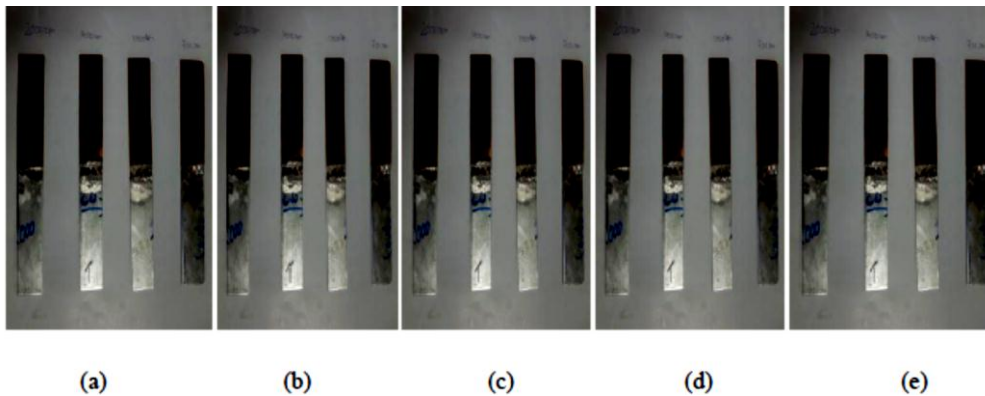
Tensile test specimens of Fsw welds (Di similar Cu & Al Alloys)at diiferenr rpms using (a) Cylindrical Tool (b) Conical Tool (c) Knurling Tool (d) Groove Tool (e) Cylindrical Thread Tool
